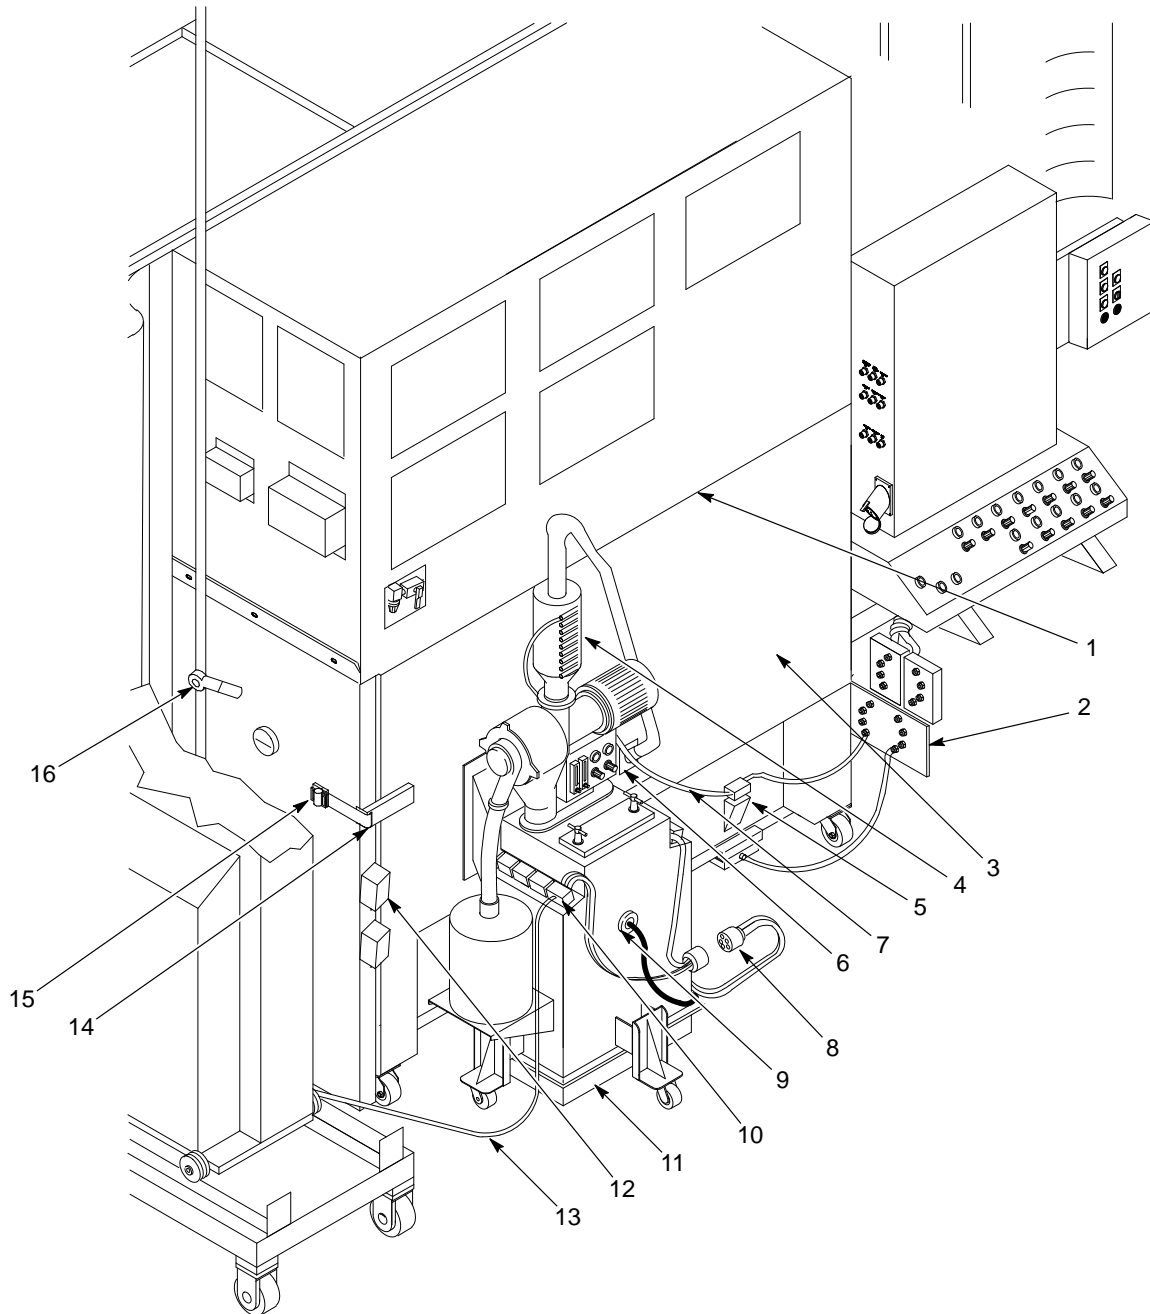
Installing a New Color Module and Feed Hopper; Steps 6-15
